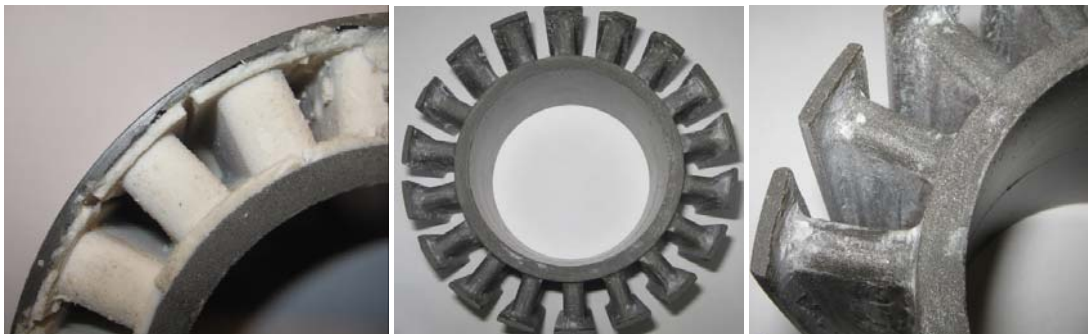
Molded core after disassembling from the mold (left), view to the whole core and to the core section
